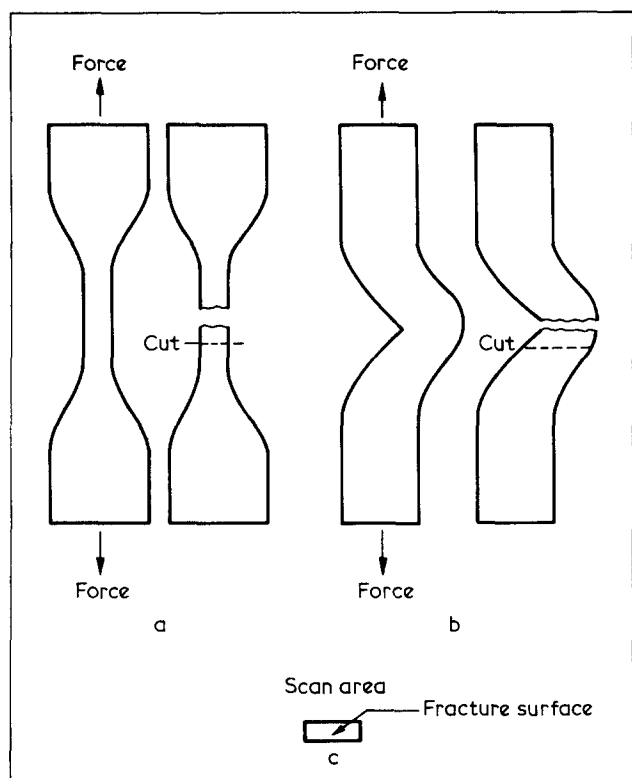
(a) Tensile test specimen before and after testing; (b) tear test specimen before and after testing; and (c) fracture surface, cut from the failed test pieces
